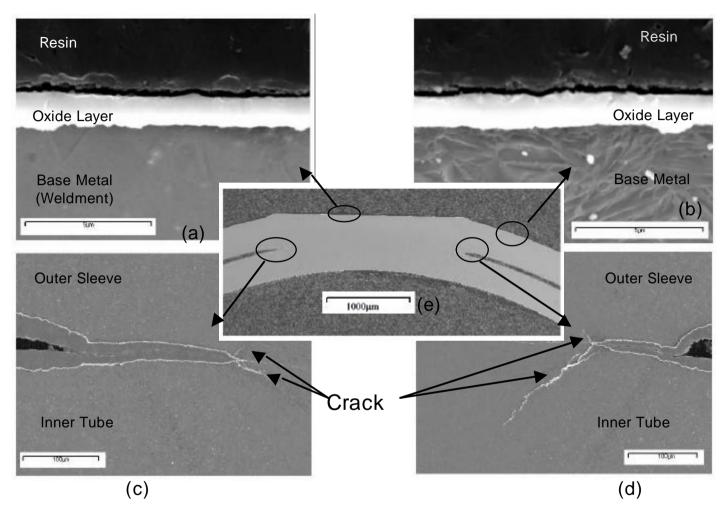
Oxide morphologies of the spot welded RXA Zircaloy-4 tube/RXA Zircaloy-4 sleeve for 17x17 design. (a) Oxide layer on the Weldment, (b) Oxide layer on the outer surface of sleeve(10,000X), (c) Left side of the welded crevice(300X), (d) Right side of the welded crevice(270X), (e) Cross-section of the spot weldment(25X)
